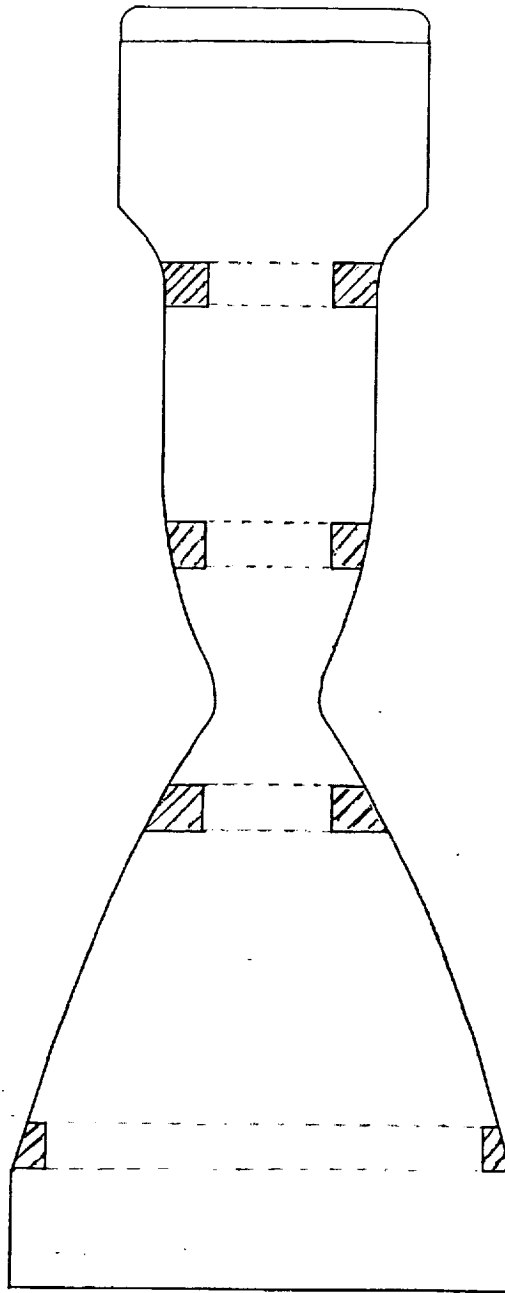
Schematic of segmented molybdenum mandrel with removable, replaceable insert rings
